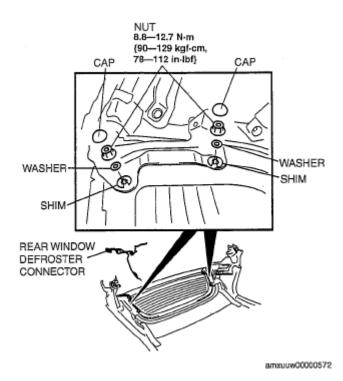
Identifying Rear Window Defroster Remove/Install Components With Torque Specifications Courtesy of MAZDA MOTORS CORP.
